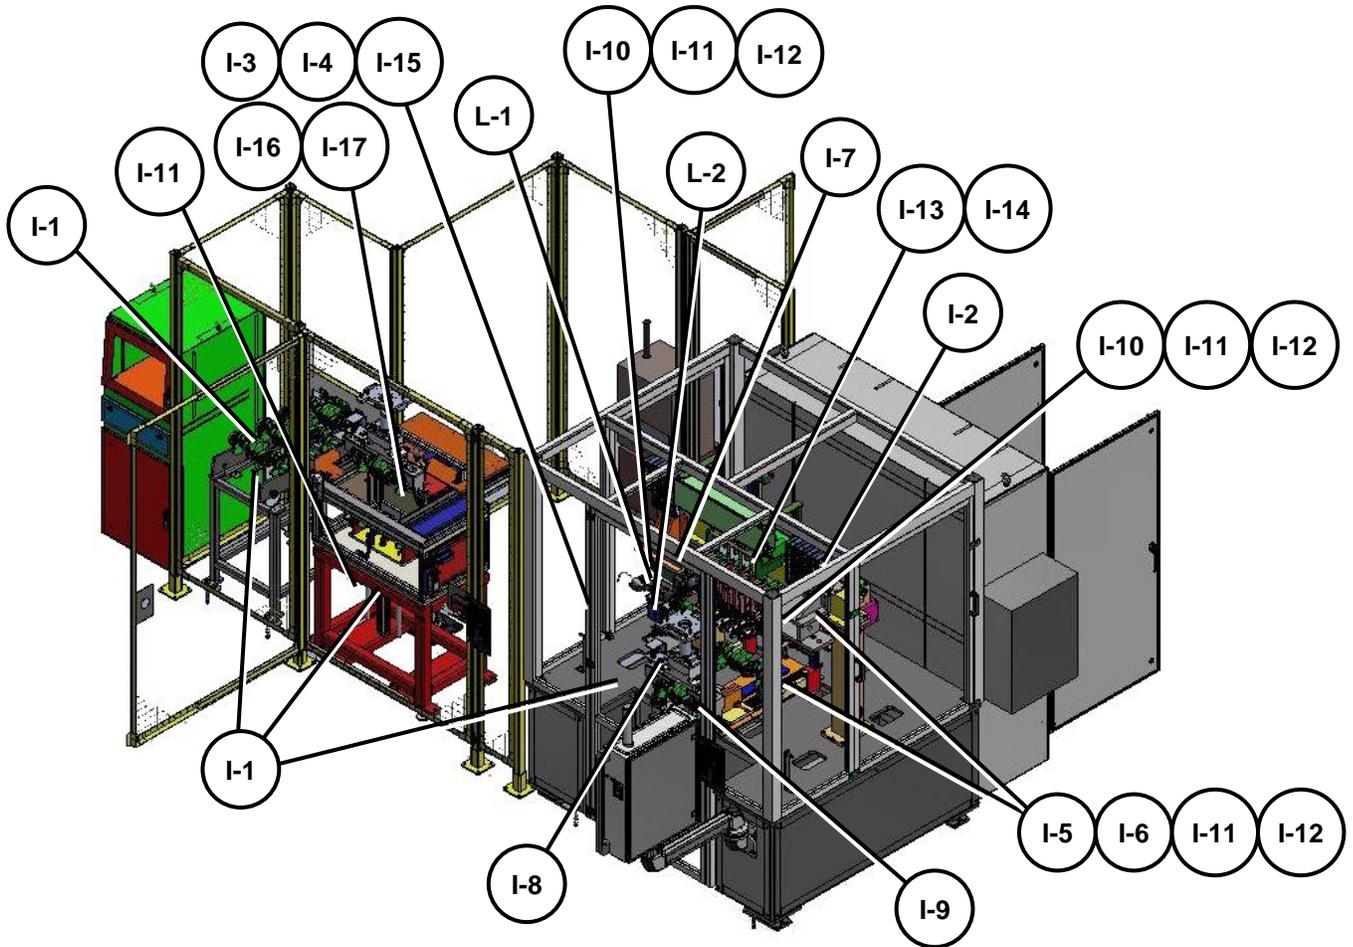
Crank Shaft Measuring Machine Station Layout
